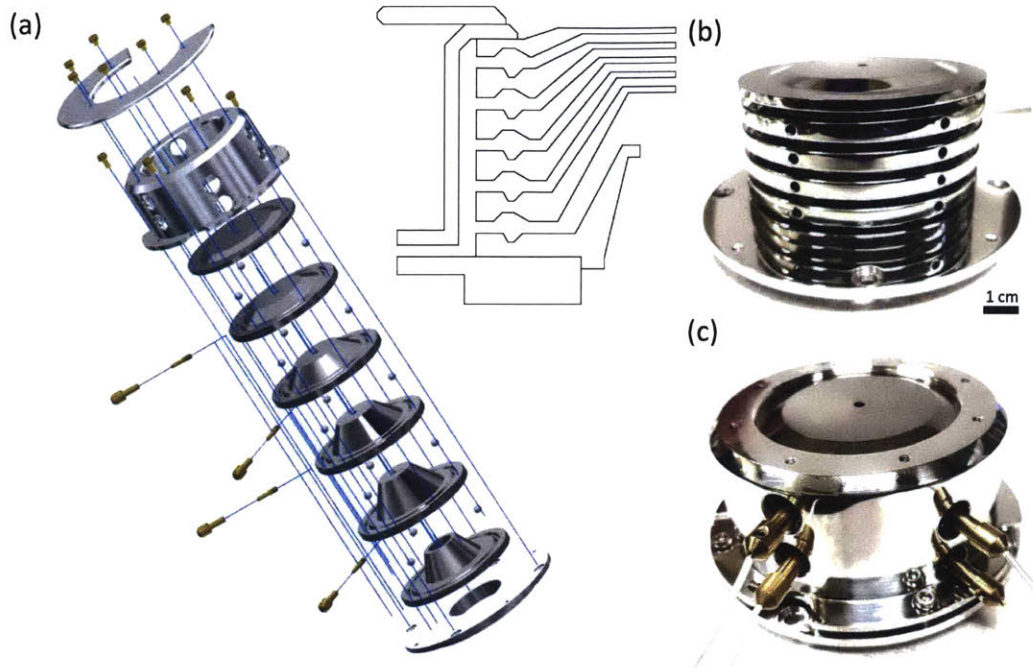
Gated mirror prototype - CAD exploded view with inset of the section (a) and assembled the prototype, before (b) and after (c) the mounting of the shield and the electrical connections.
